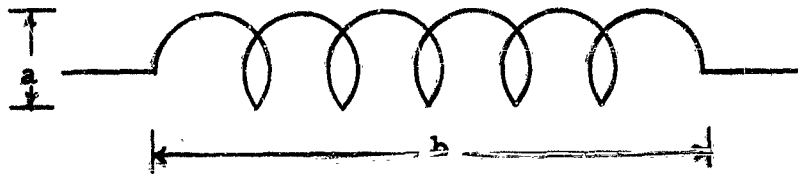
B Dimensions of Single-Layer Air-Core Coil
